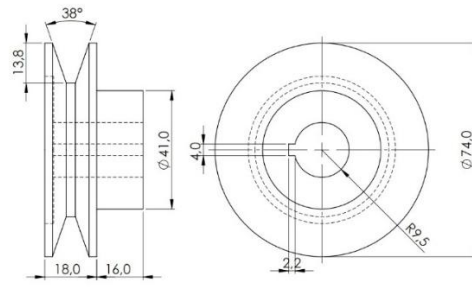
Geometrical dimensions of the sand-cast aluminum pulley
